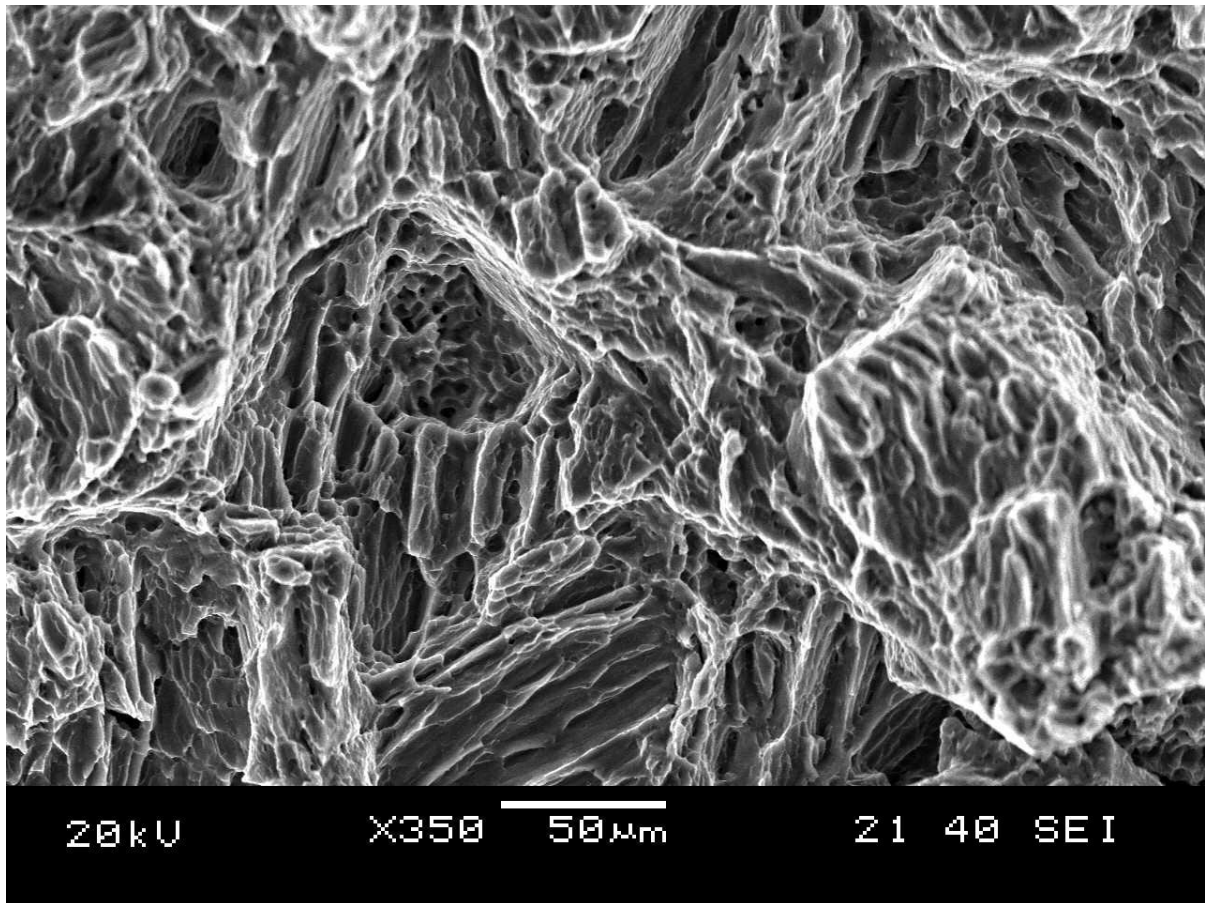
SEM image of the diode laser weld brittle fracture surface.
